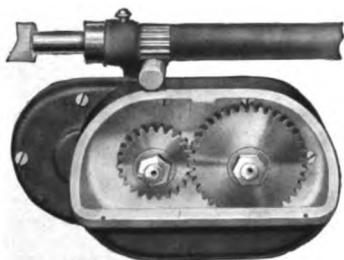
SMALL SPEED TRANSPOSING GEAR ON REAR, OR DRIVING SHAFT
